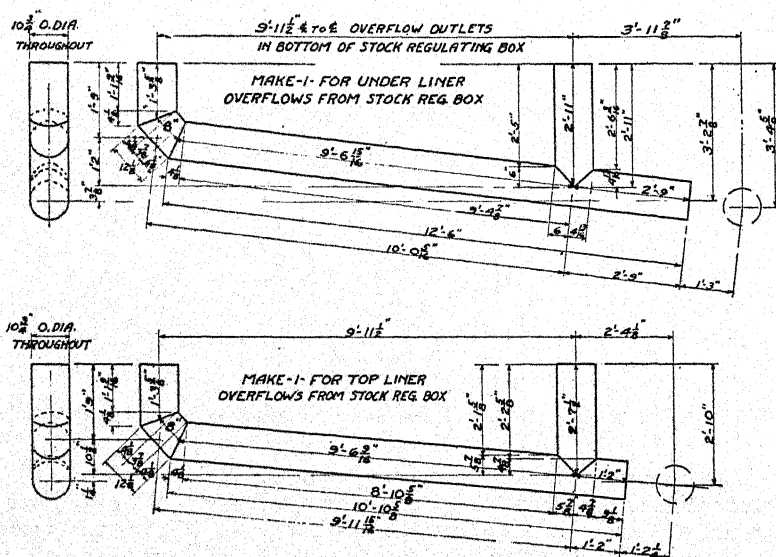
Arc welded pipe fitting—working drawing.
